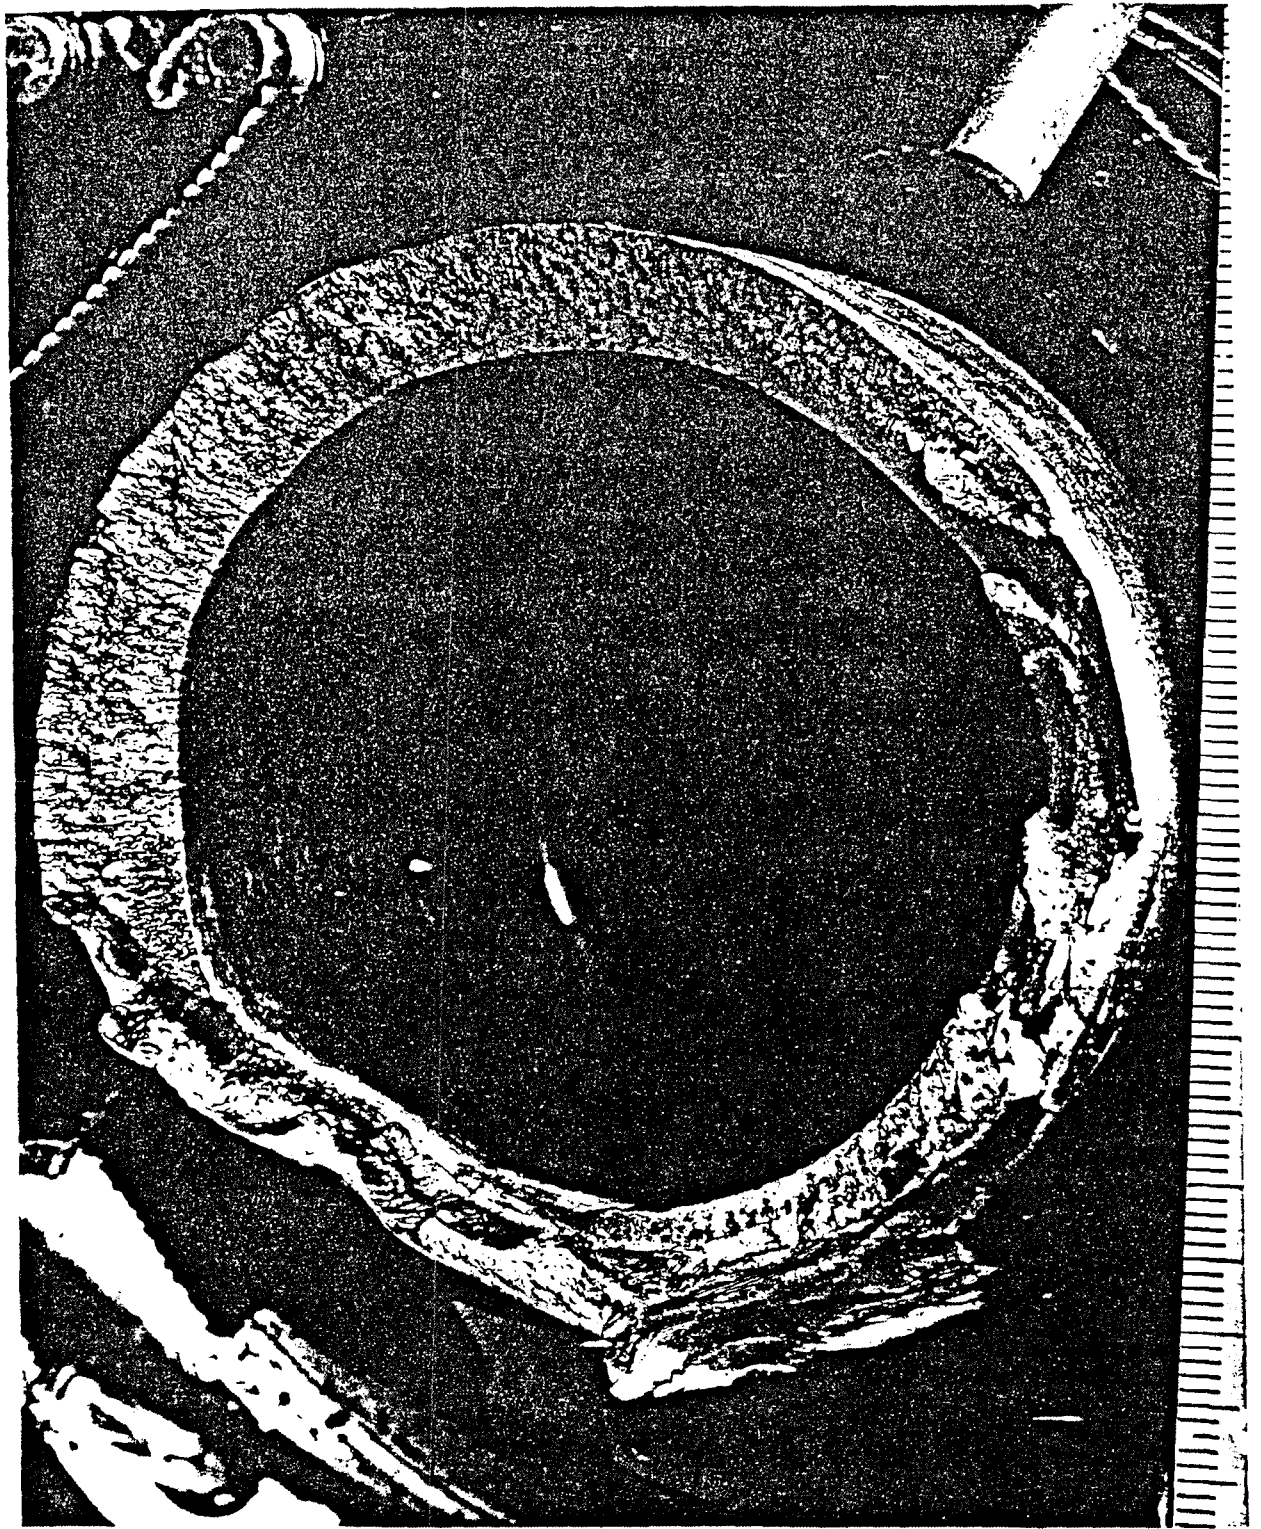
Fracture surface of the RH-engine propeller shaft.
